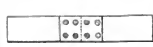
Double-riveted joint, with single welt, countersunk and snap-headed.
